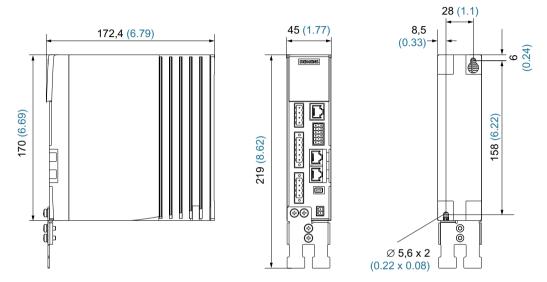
Dimension drawing SINAMICS S210 FSA, dimensions in mm (Inch)
